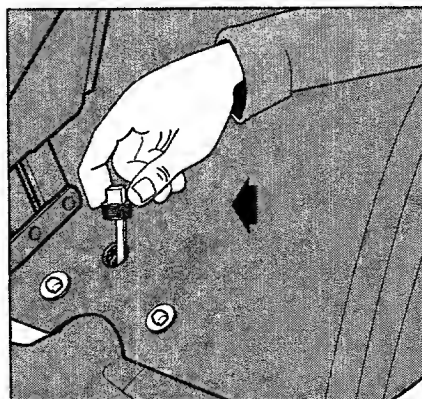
Remove dipstick with a 9/16" wrench to check gear oil level in tine attachment transmission. Markings on dipstick must face rear of tiller when checking oil level.
